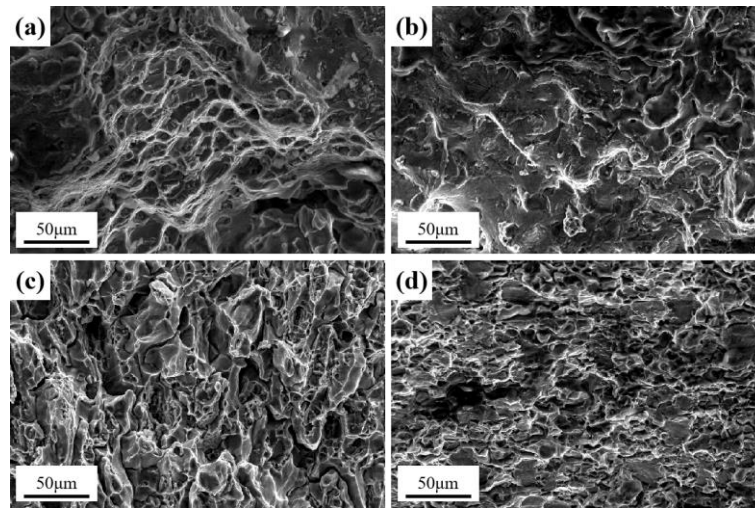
SEM of the tensile fractures surfaces of 7046 alloy: (a) as-cast; (b) T6; (c) 300°C4P-T6; (d) 300°C4P-R80%-T6.
